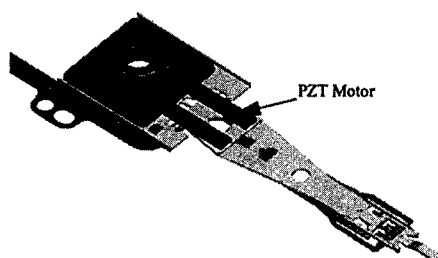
Schematic illustration of an actuated TSA (aTSA) suspension assembly.
